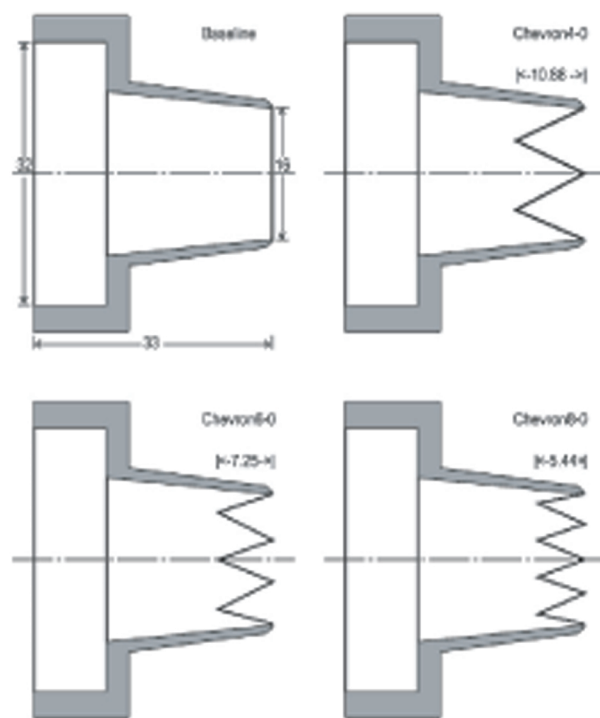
Dimensions of the fabricated in millimeter (section plane passes through the chevron tip)^[13]
